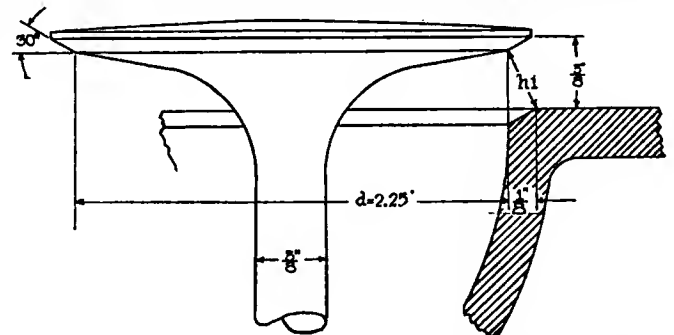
Full-size sketch, showing actual dimensions of a valve of the 22-70 hp. Mercer engine
